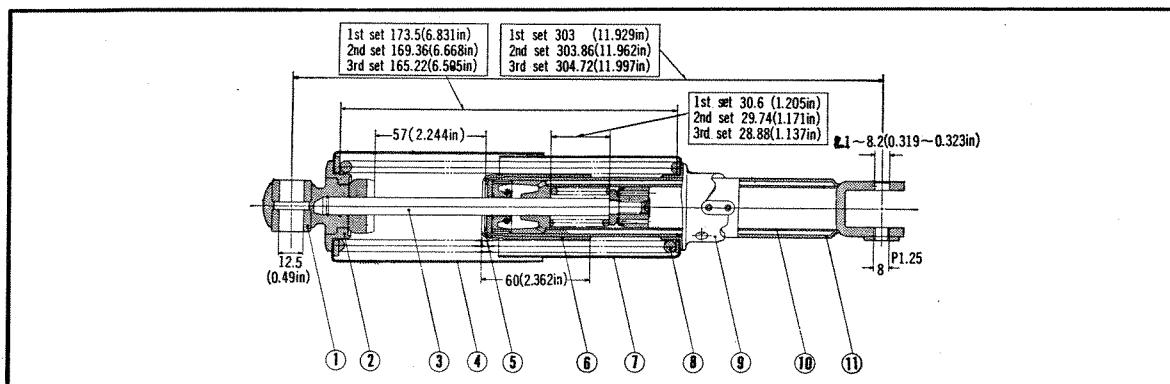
Sectional view of rear cushion (CL175)
